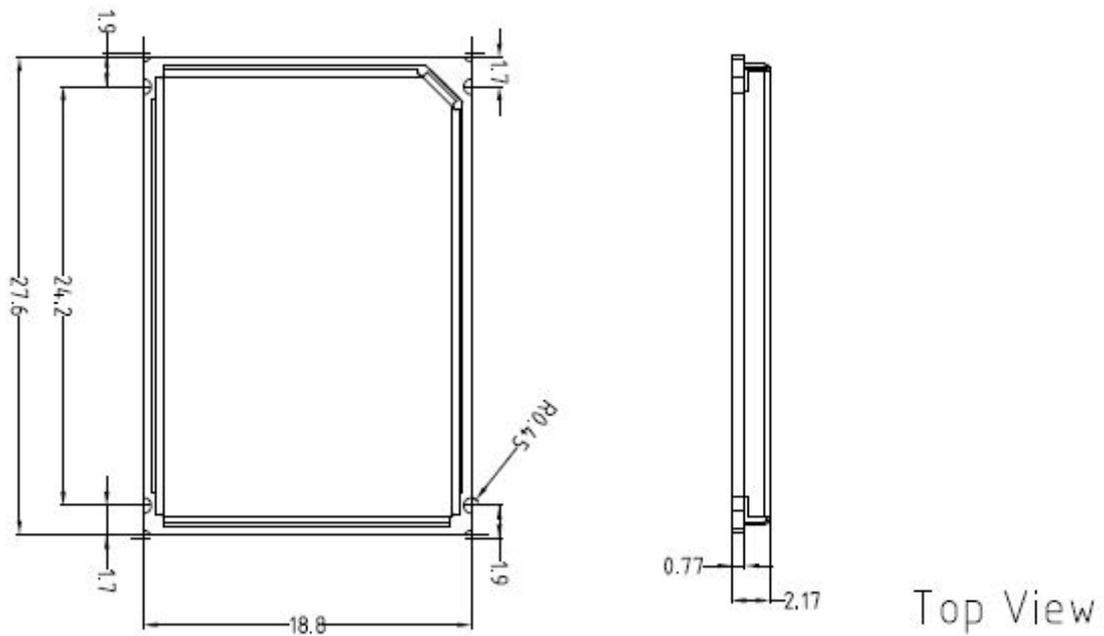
Dimensions of EMS31-US (all dimensions in mm)
